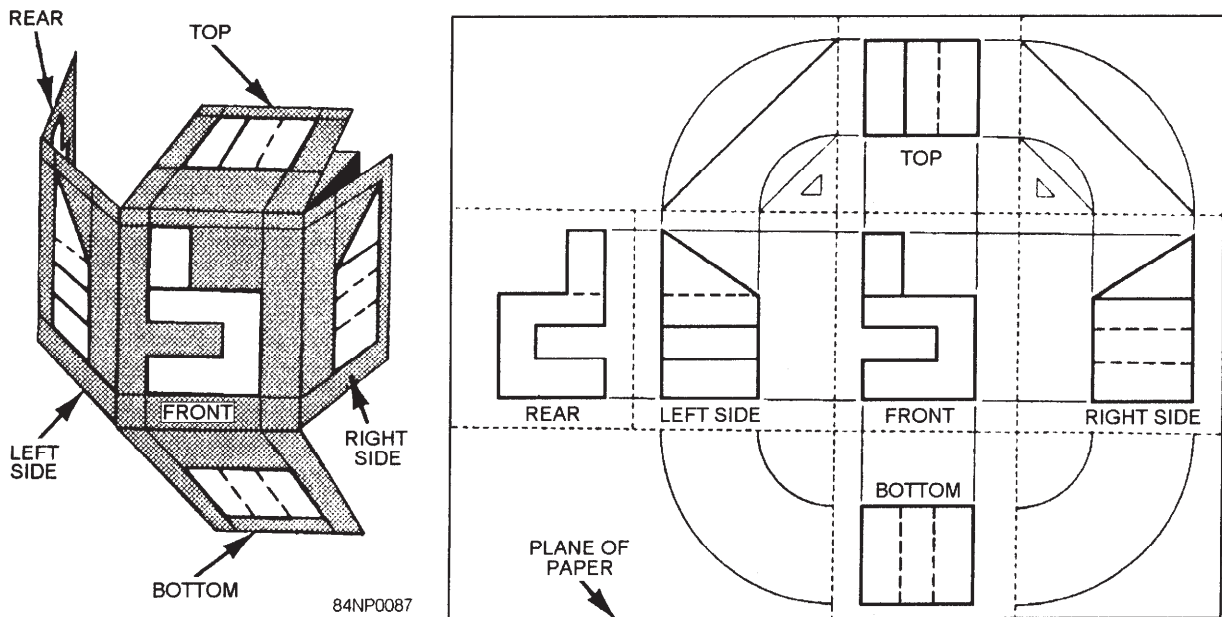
American standard arrangement of views in a six-view third-angle multi-view projection.
